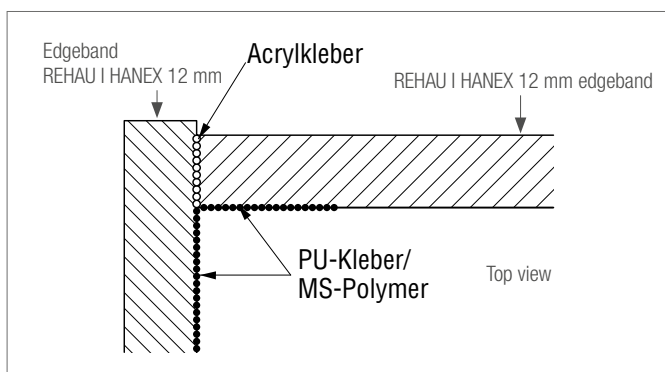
Applying edgeband (REHAU | HANEX 10 mm)
